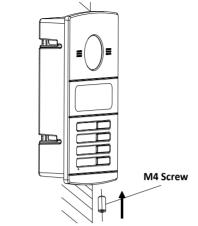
Secure the Door Station (DS-KV8X02-IM)
